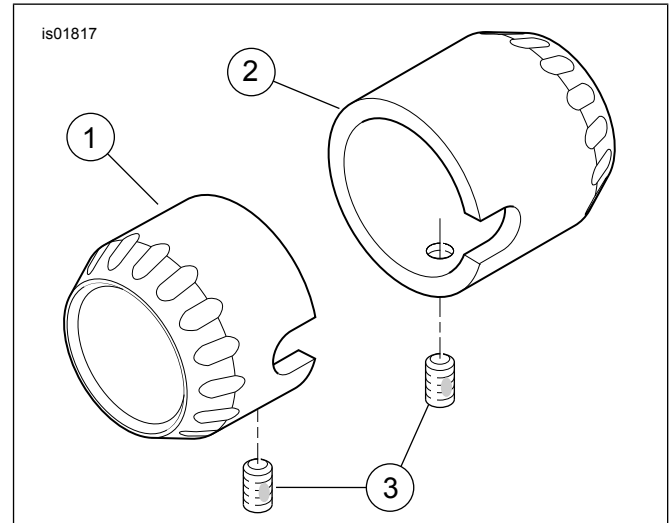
Service Parts: Softail Rear Axle-Nut Cover Kit (Fluted)
